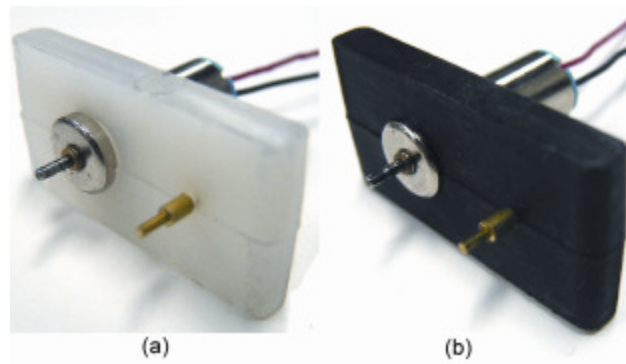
In-mold assembled motor holders: (a) unfilled Nylon 12, (b) thermally conductive filled Nylon 12
